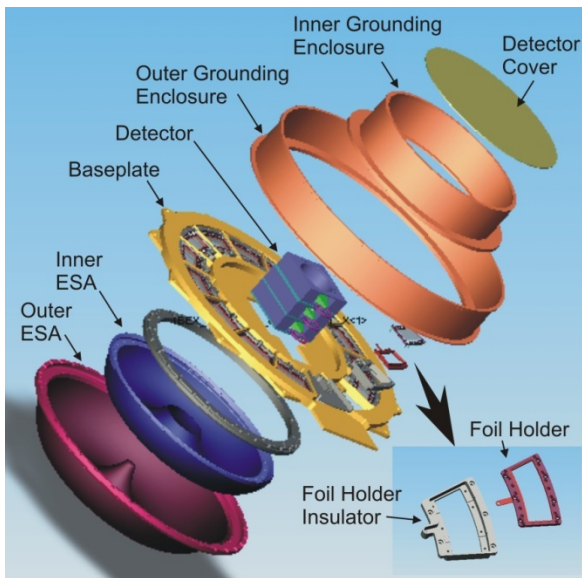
EXPLODED CAD VIEW OF THE IBEX-HI PROTOTYPE INSTRUMENT.
